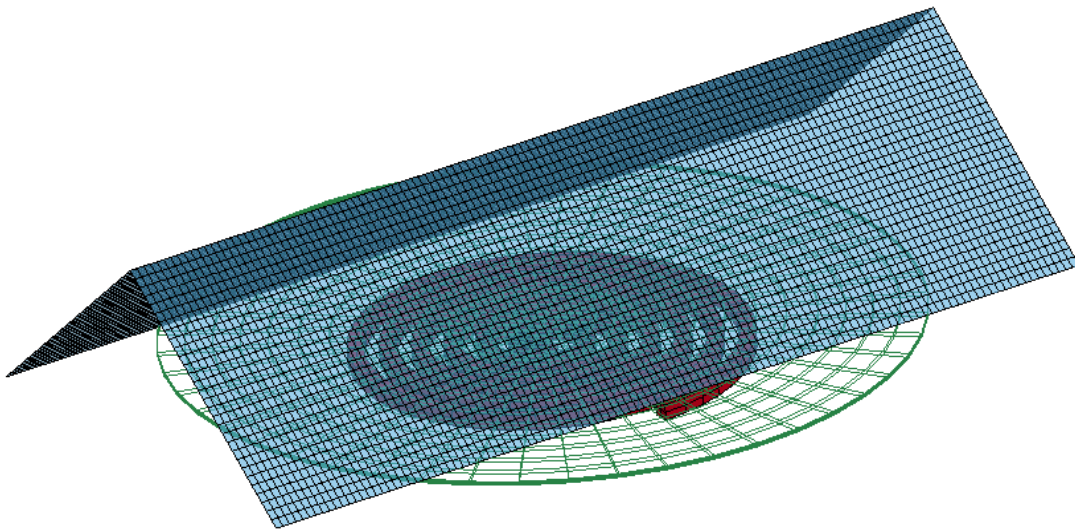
Magnetic metal forming with spiral coil and non-axisymmetric die. 3D setup.
